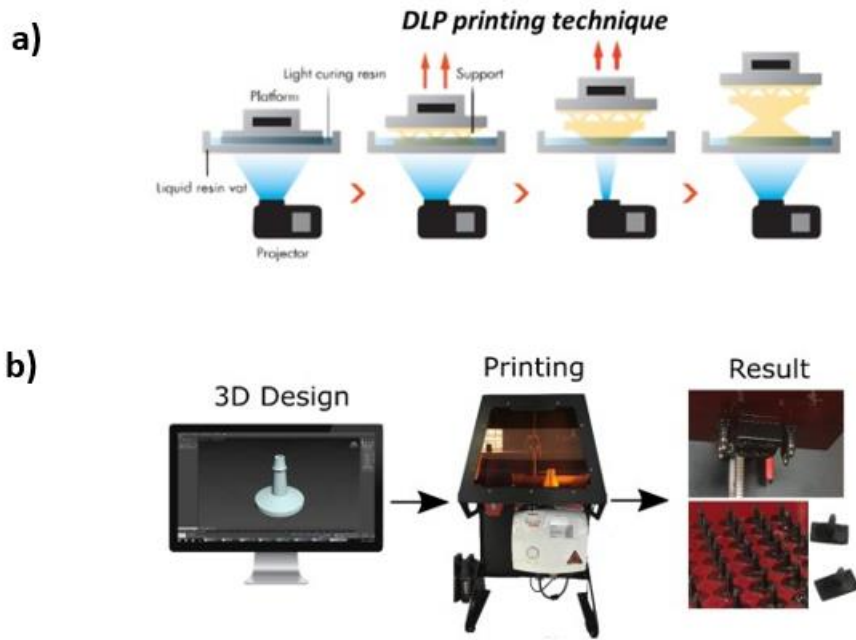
a) DLP printing technique b) Printing process from design to product [3].
